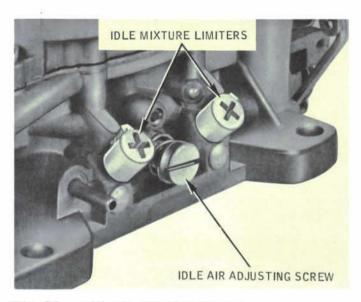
Idle Air Adjusting Screw — Carter 4-V Carburetor for Lincoln
